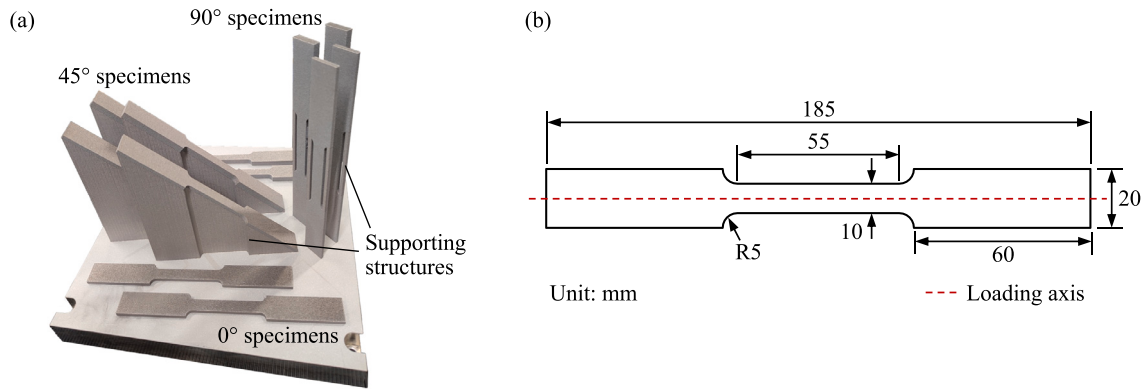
Tensile coupons: (a) as manufactured on the building plate; (b) nominal dimensions.
